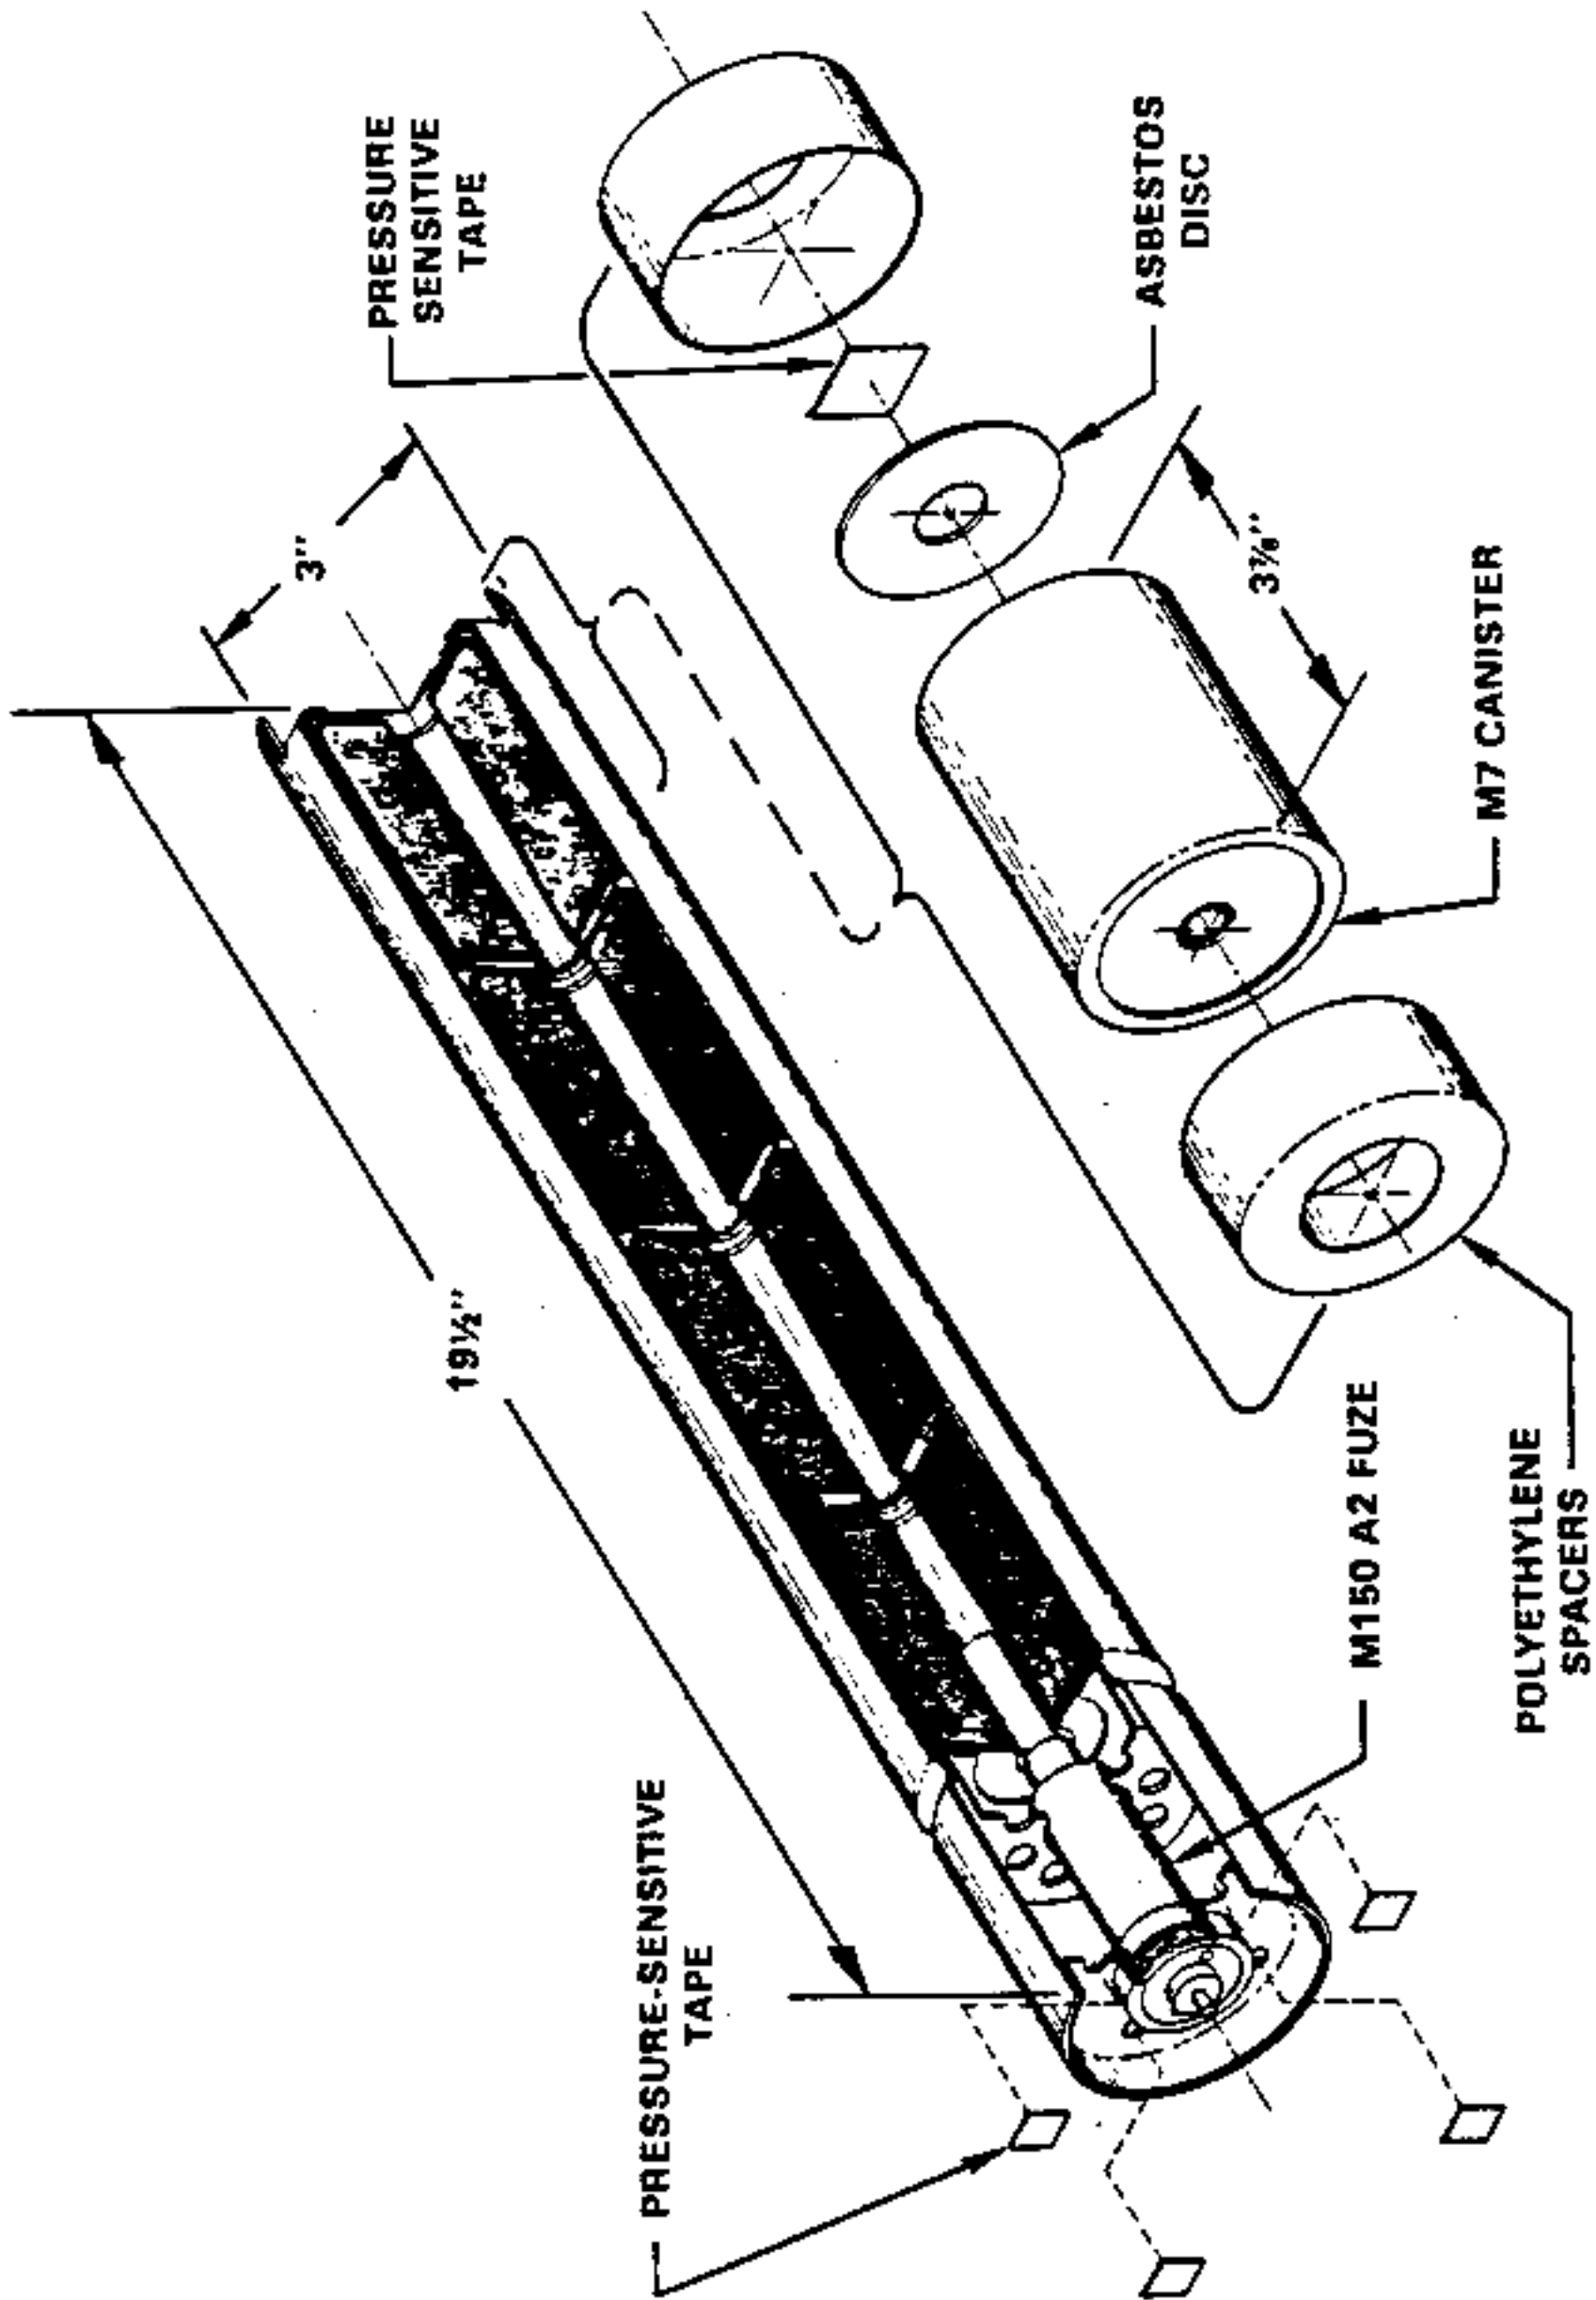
M138 BZ BOMB ASSEMBLY
